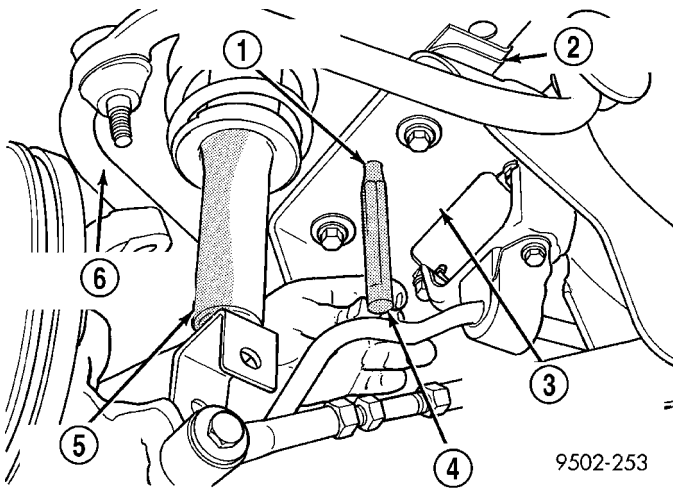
Locating Rear Suspension Crossmember In Vehicle
